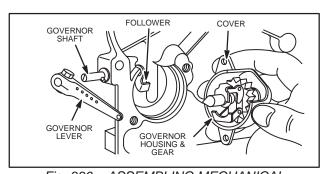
ASSEMBLING MECHANICAL GOVERNOR
